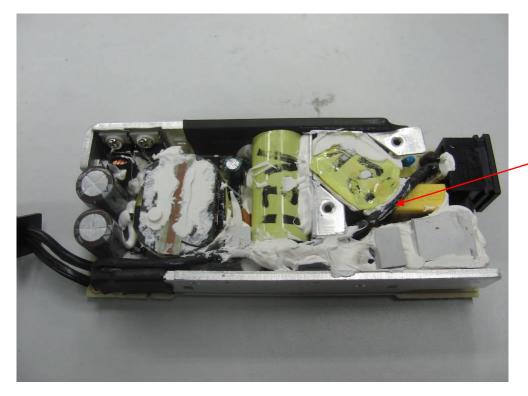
GT*41133 series Component side view of PCB for power adapter model (Top heatsink removed)
